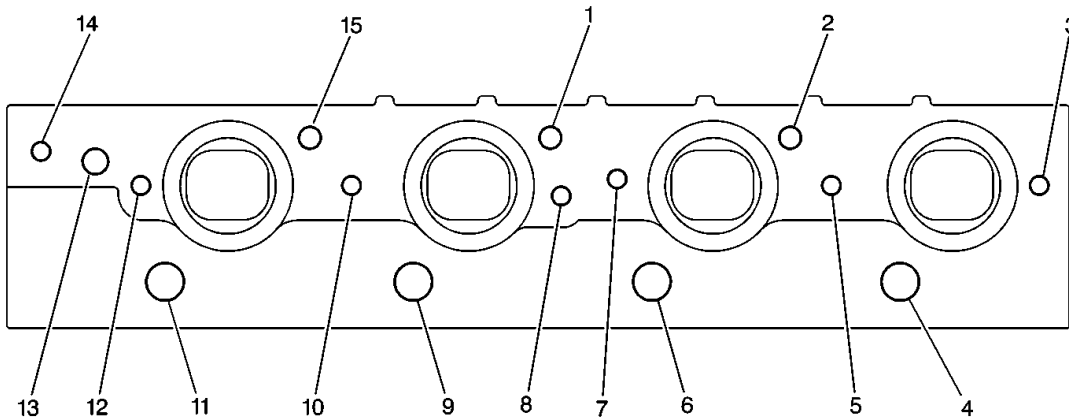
Cylinder Head Bolt Holes - Exhaust Manifold Deck View
